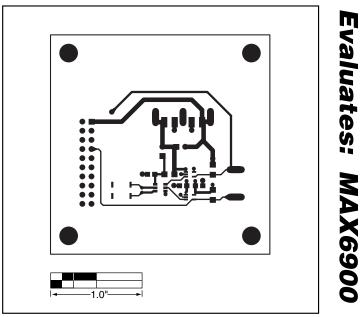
MAX6900 EV Kit PC Board Layout—Component Side
